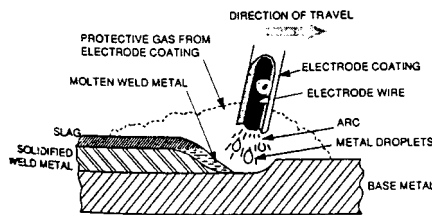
Shielded-metal arc-welding process. (From *ASM Handbook, Welding, Brazing, and Soldering*, Vol. 6, 10th ed., ASM International, Metals Park, OH, 1993, 175. With permission.)
